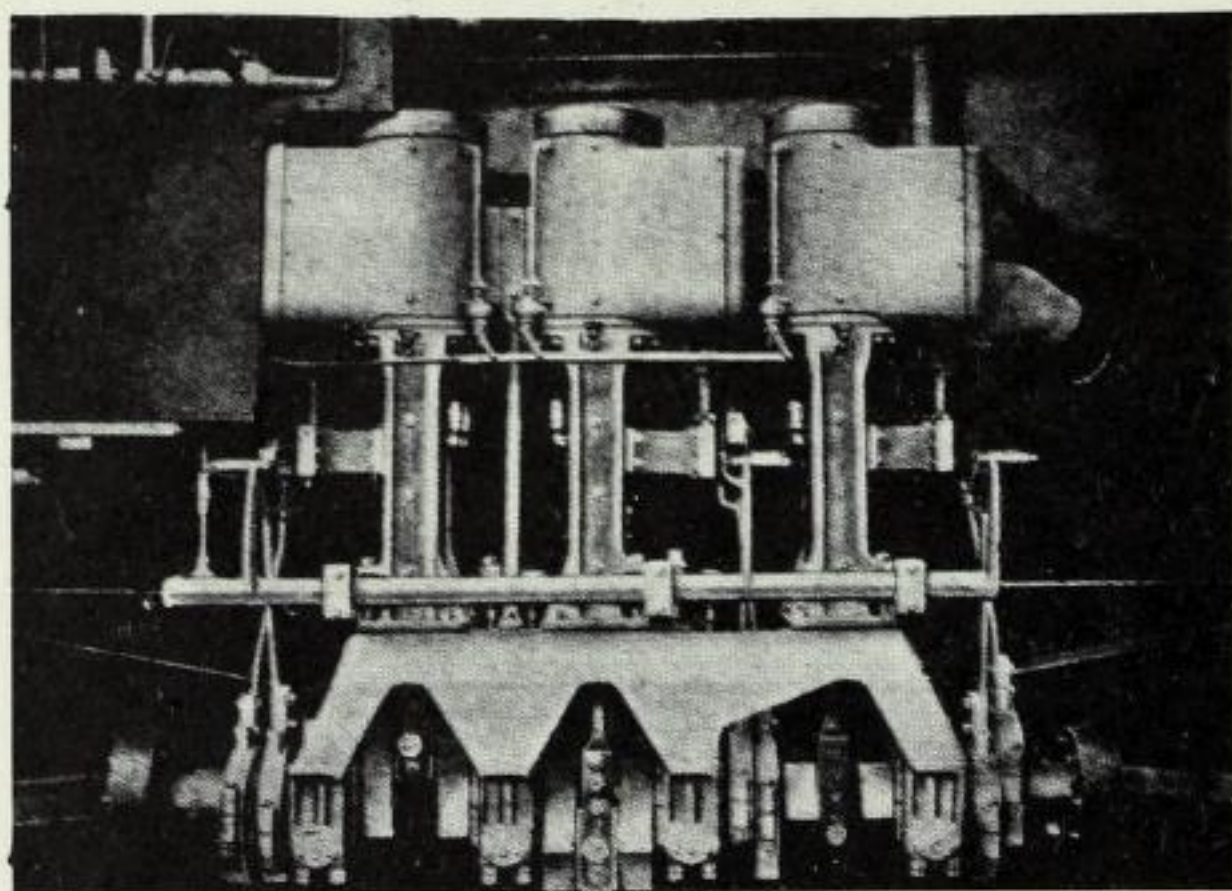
Arrangement of Cylinders and Valve Motion of Shay Geared Locomotives.
